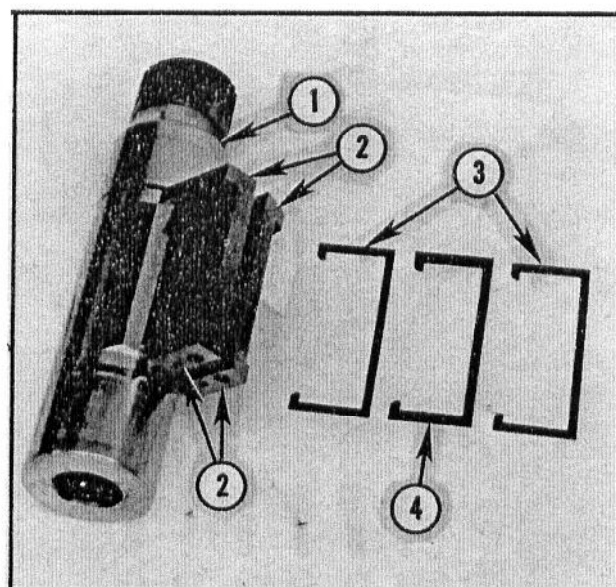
Vaned Shaft and Seals — Orifice Plates Removed
